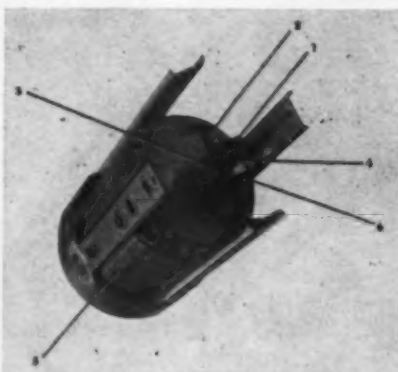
Lower unit assembly showing details of temperature probe release mechanism, bathythermograph transmitter set: 1) release lever, 2) tension spring, 3) fuse wire and protective sleeve, 4) release pin, 5) cable reel assembly, 6) insulating block.
